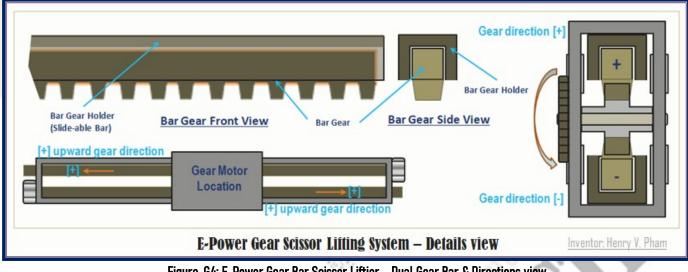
E-Power Gear Bar Scissor Liftier - Dual Gear Bar & Directions view
